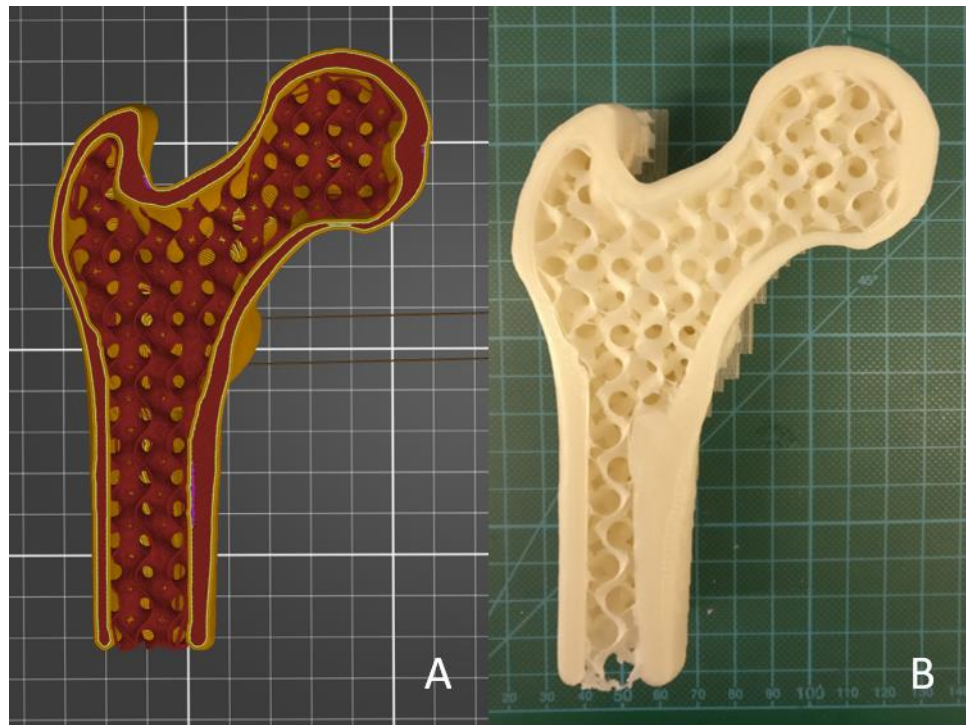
Infill show of OBS. (A) printing file in Prusa Slicer® (B) printed bone
